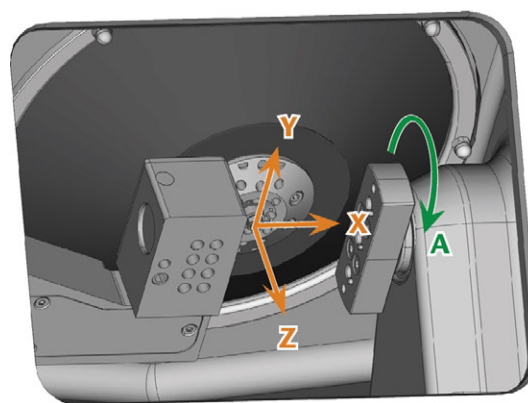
N4+: LINEAR AXES X, Y, Z (THE SPINDLE MOVES ALONG THESE AXES.); ROTATIONAL AXIS A (THE BLANK HOLDER ROTATES ABOUT THIS AXIS.)
